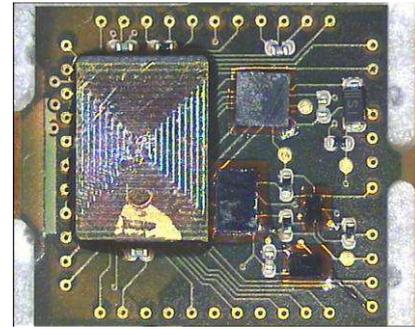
Completed backside of the micro camera module with ACA assembled circuits
